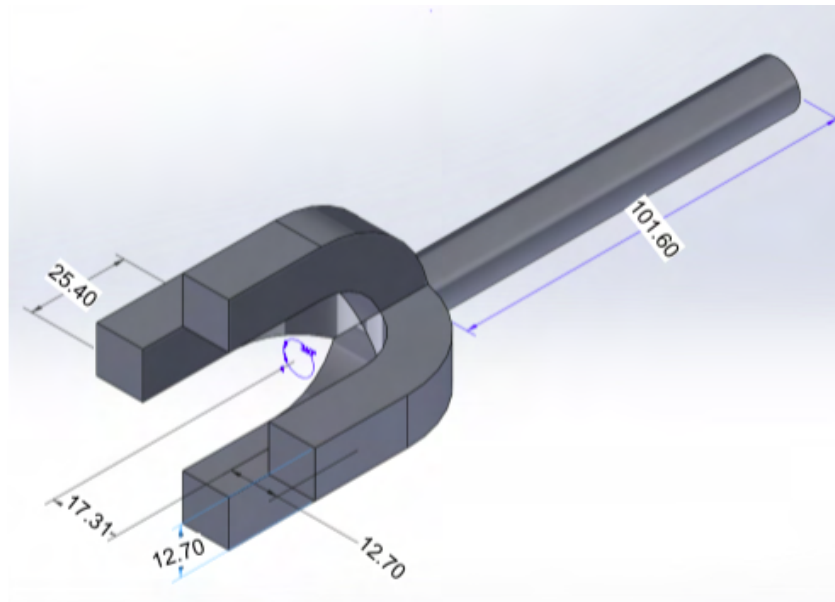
SOLIDWORKS image of edited Valve holder with dimensions in mm
